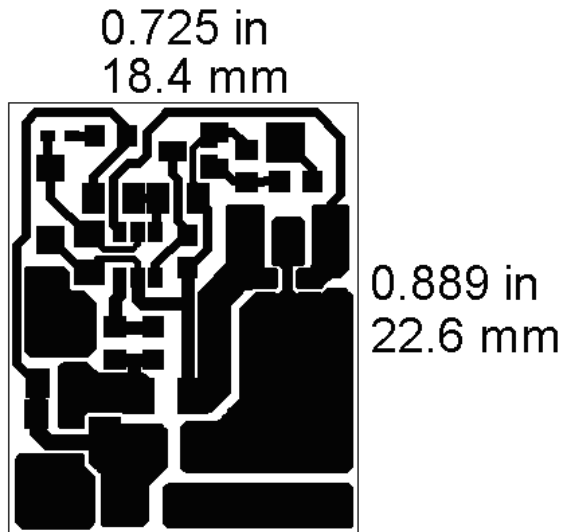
PCB Design the Circuit Calculated Above. Only Single Layer PCB is Used for the Application.
